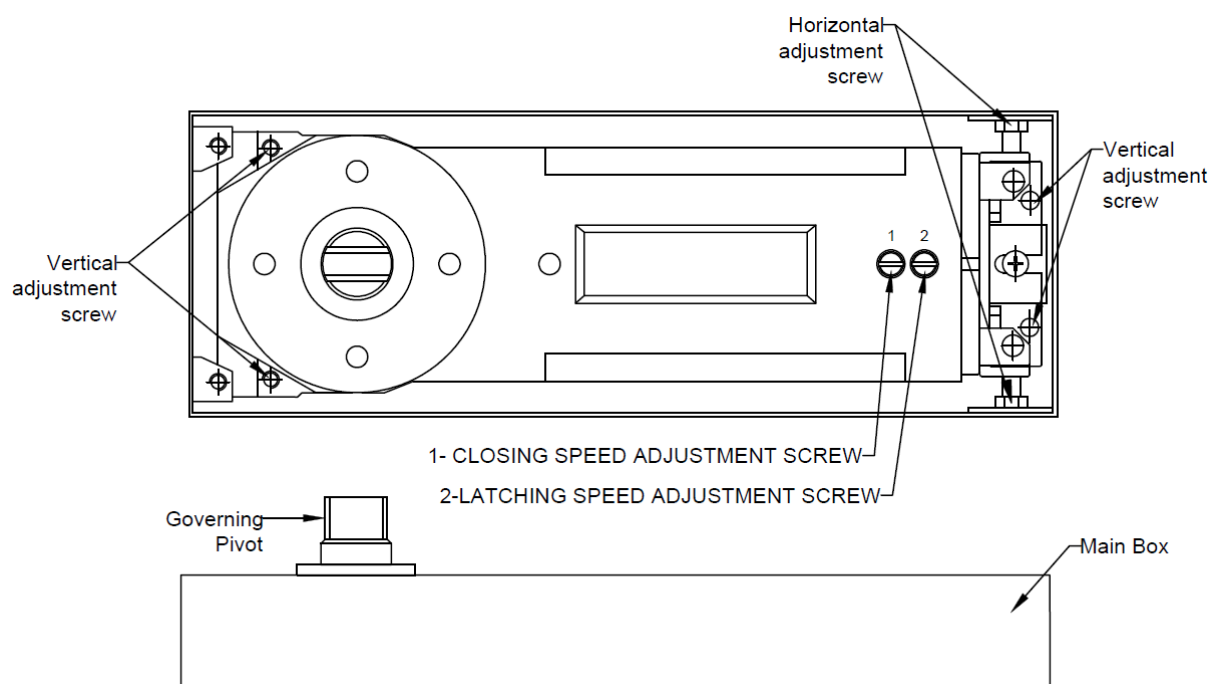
TYPICAL DETAILS OF FLOOR SPRING (COVER REMOVED)
